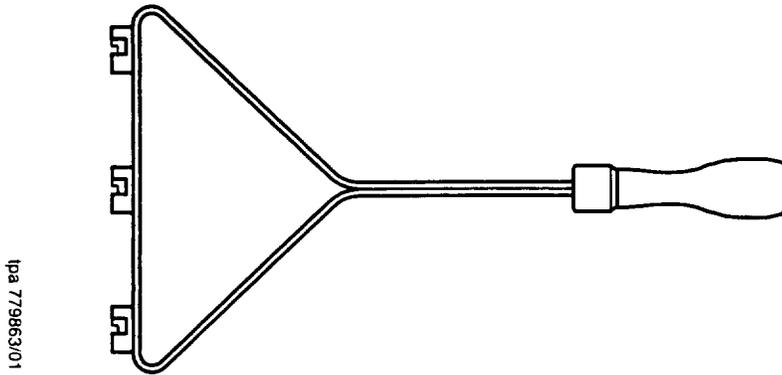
KS-22616, L1 Connecting Block Removal Tool
